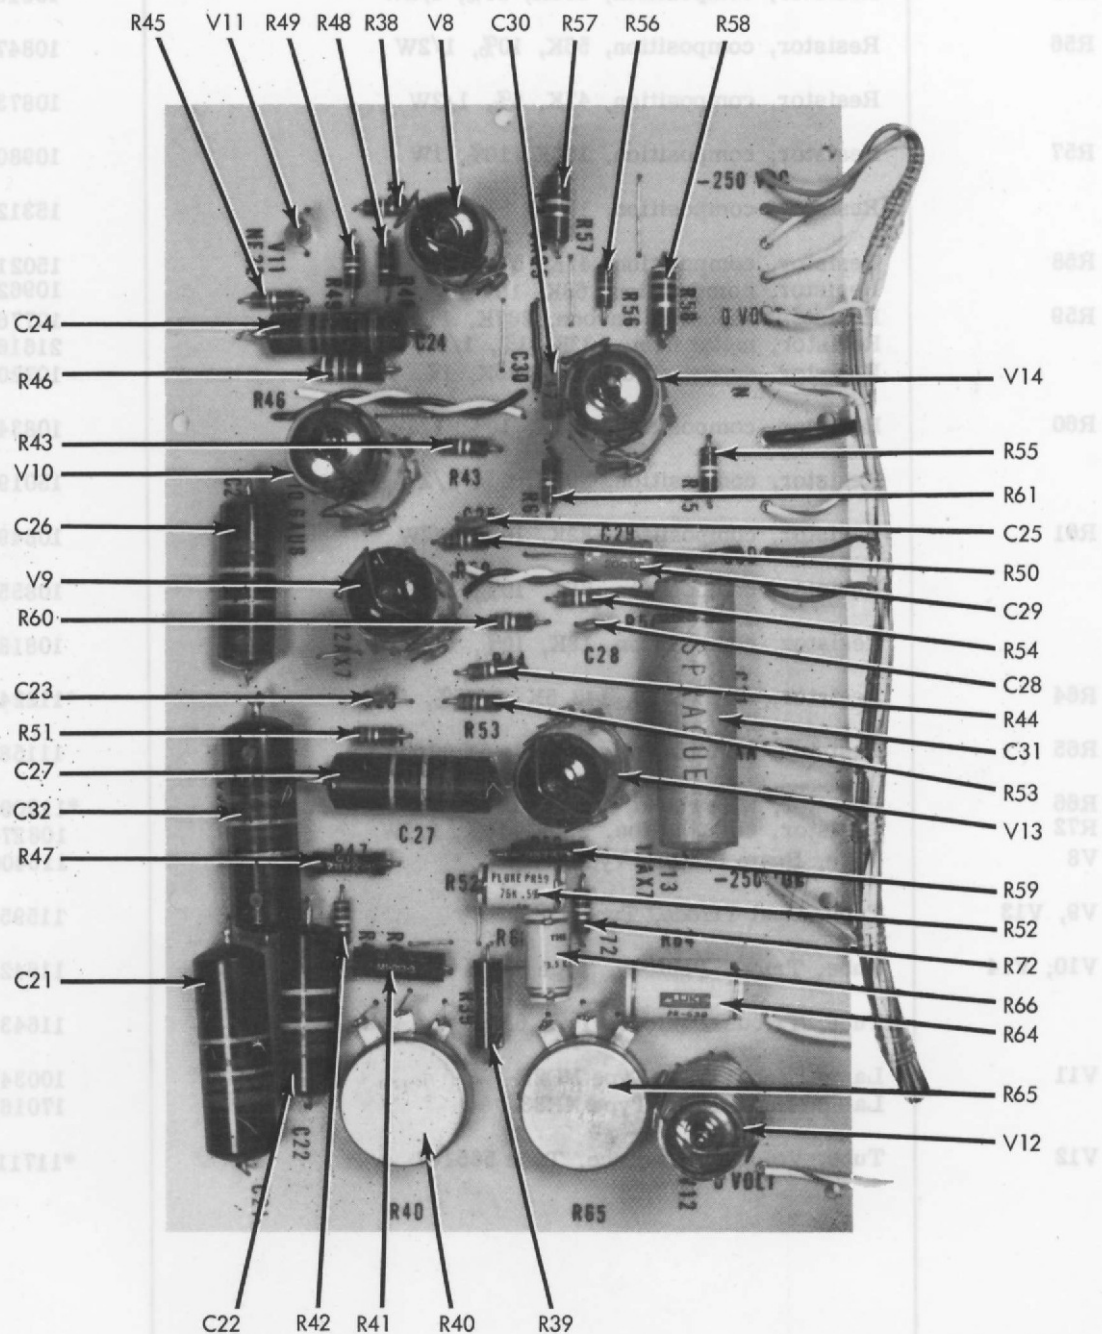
AMPLIFIER PRINTED CIRCUIT BOARD ASSEMBLY
